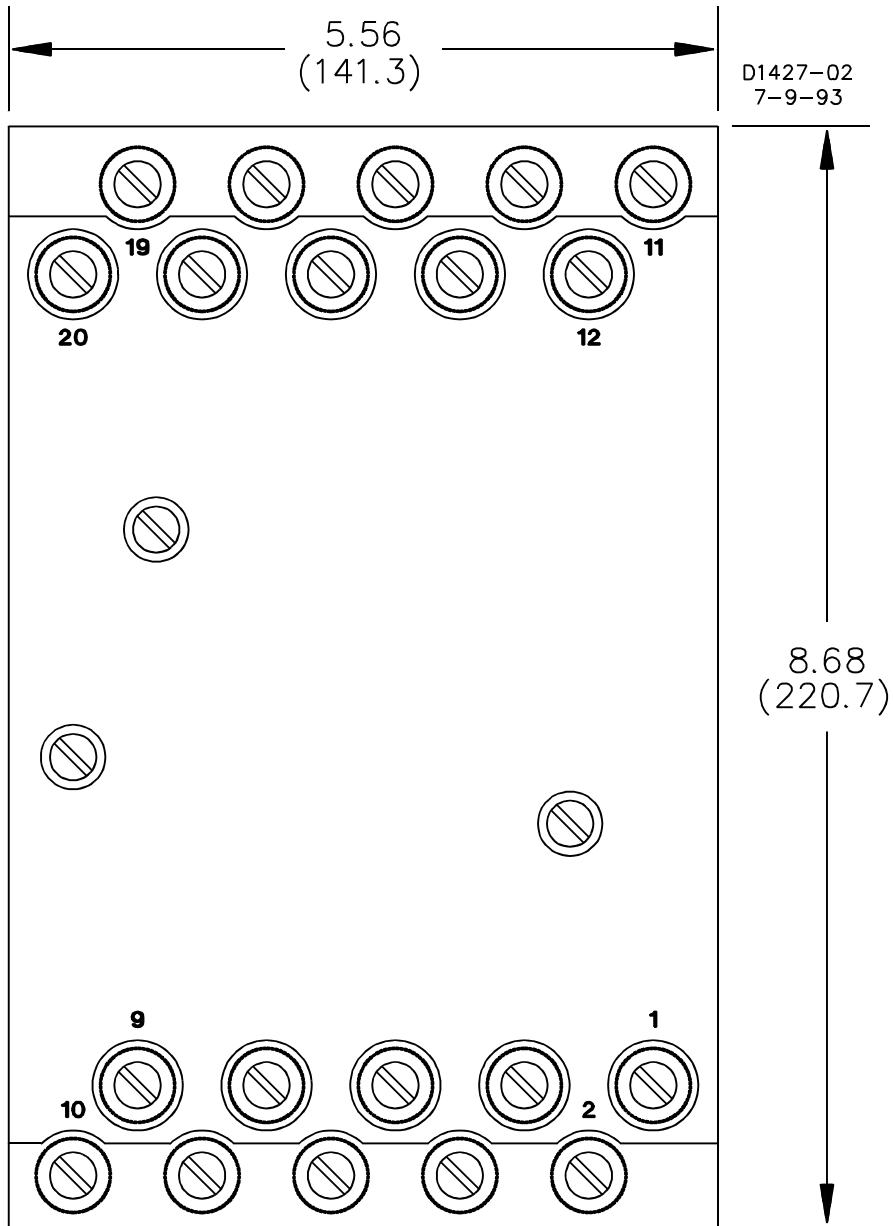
S1 Case, Double-Ended, Projection Mount, Outline Dimensions, Rear View
